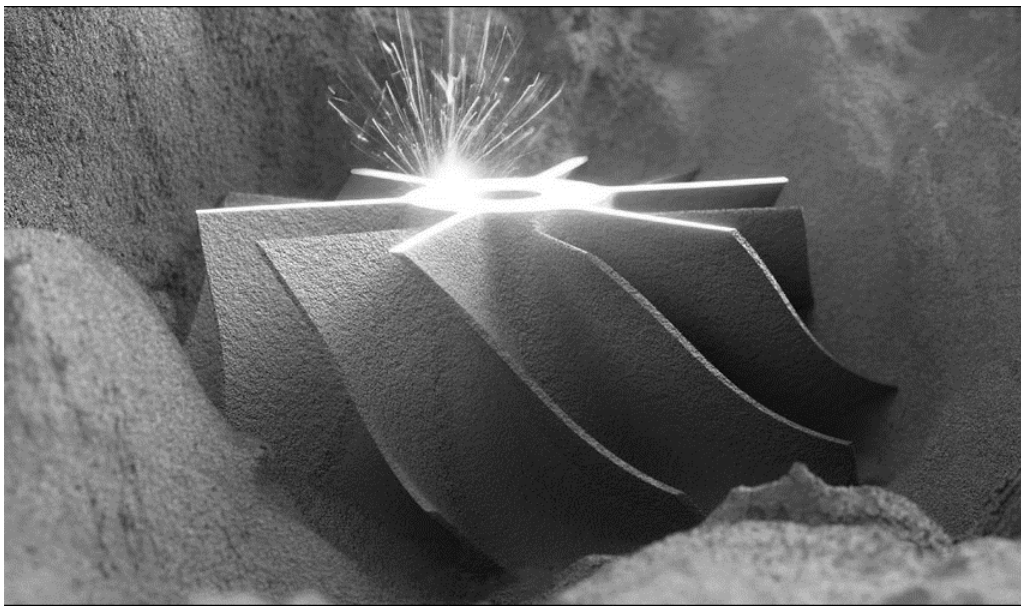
PBF with a laser manufacturing a complicated 3D part [12].
